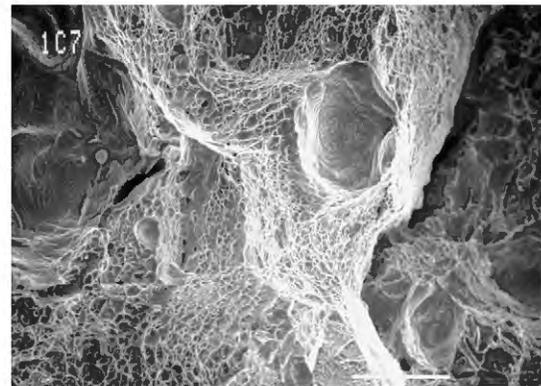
Ductile fracture surface of a cast gold alloy specimen that was loaded to failure in tension, illustrating the appearance of a dimpled rupture. The overall topography of the fracture surface indicates the grain size of the alloy, and casting porosity can also be seen ($\times 2000$, with scale bar length of 10 μm). (From Reisbick MH, Brantley WA: Mechanical property and microstructural variations for recast low-gold alloy. *Int J Prosthodont* 8:346, 1995.)
